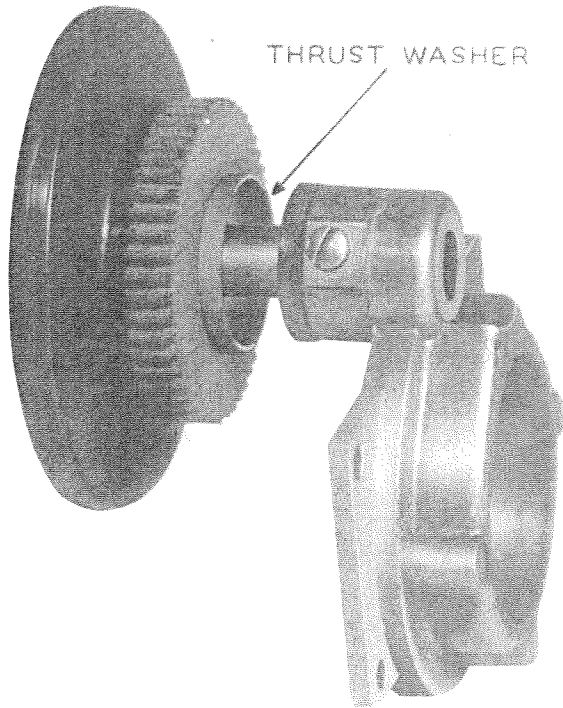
Flange Type Oilite Bearing with Thrust Washer
